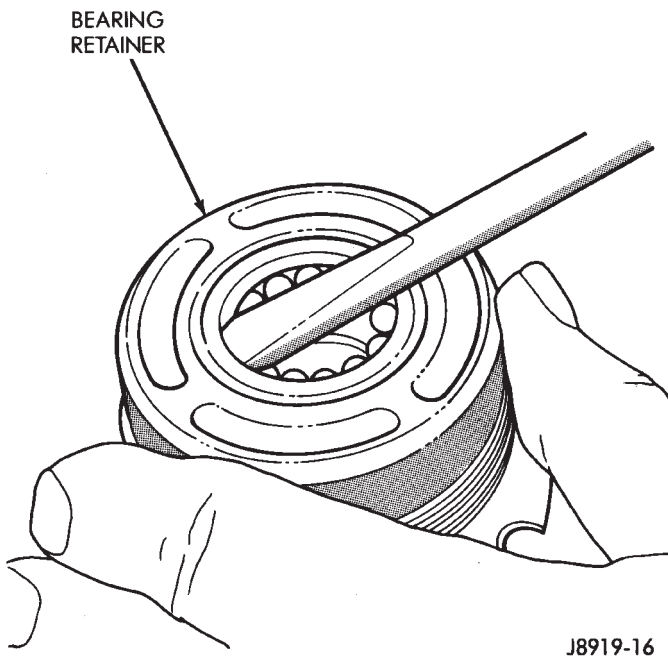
Wormshaft Lower Bearing Retainer Removal
